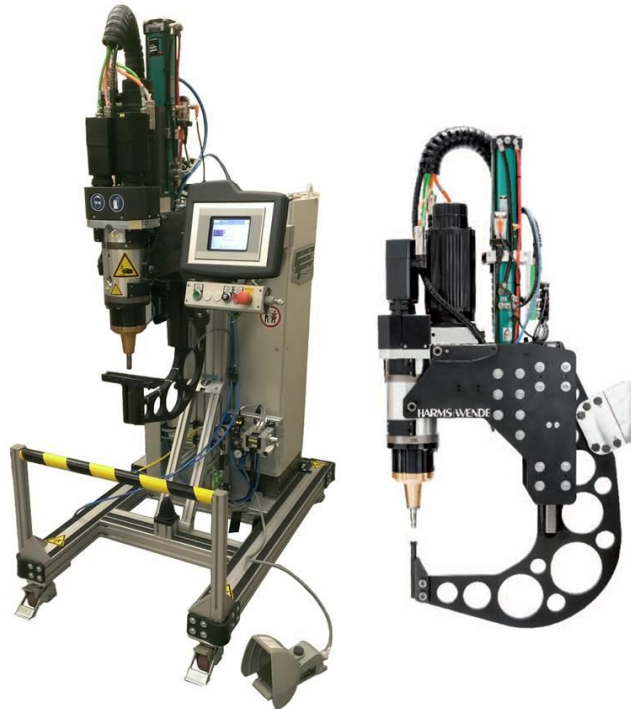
Pedestal FSSW machine (left) and C-frame FSSW unit (right) – Courtesy of [1-18]
